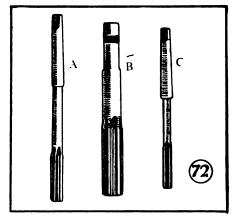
A is the 29/64-in. reamer to ream the push rod holes 1/64 in. oversize; B is the camshaft bearing bushing reamer, and C is the 21/64-in. reamer for reaming the valve stem guides 1/16 in. oversize
